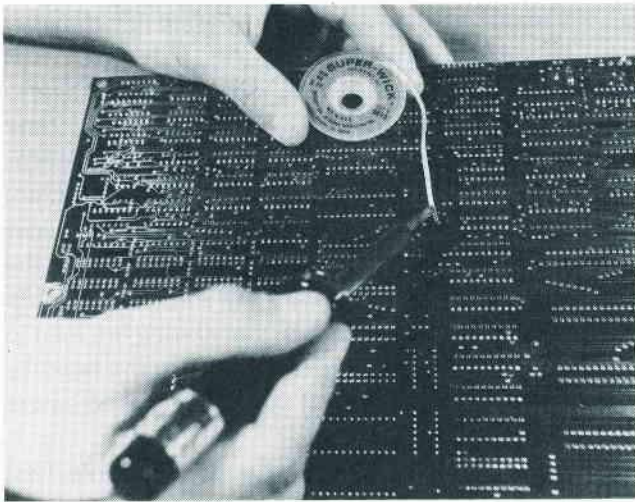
Use of a solder wick is another way to remove solder from a connection.
